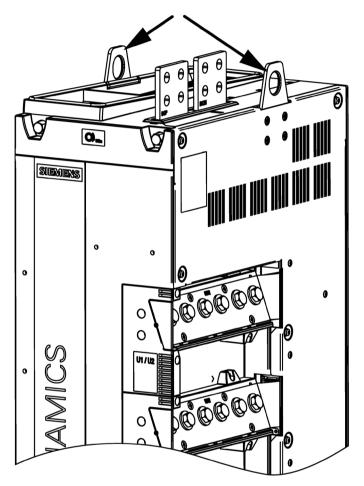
Crane lifting lugs for Active Line Module and Motor Module Chassis-2
